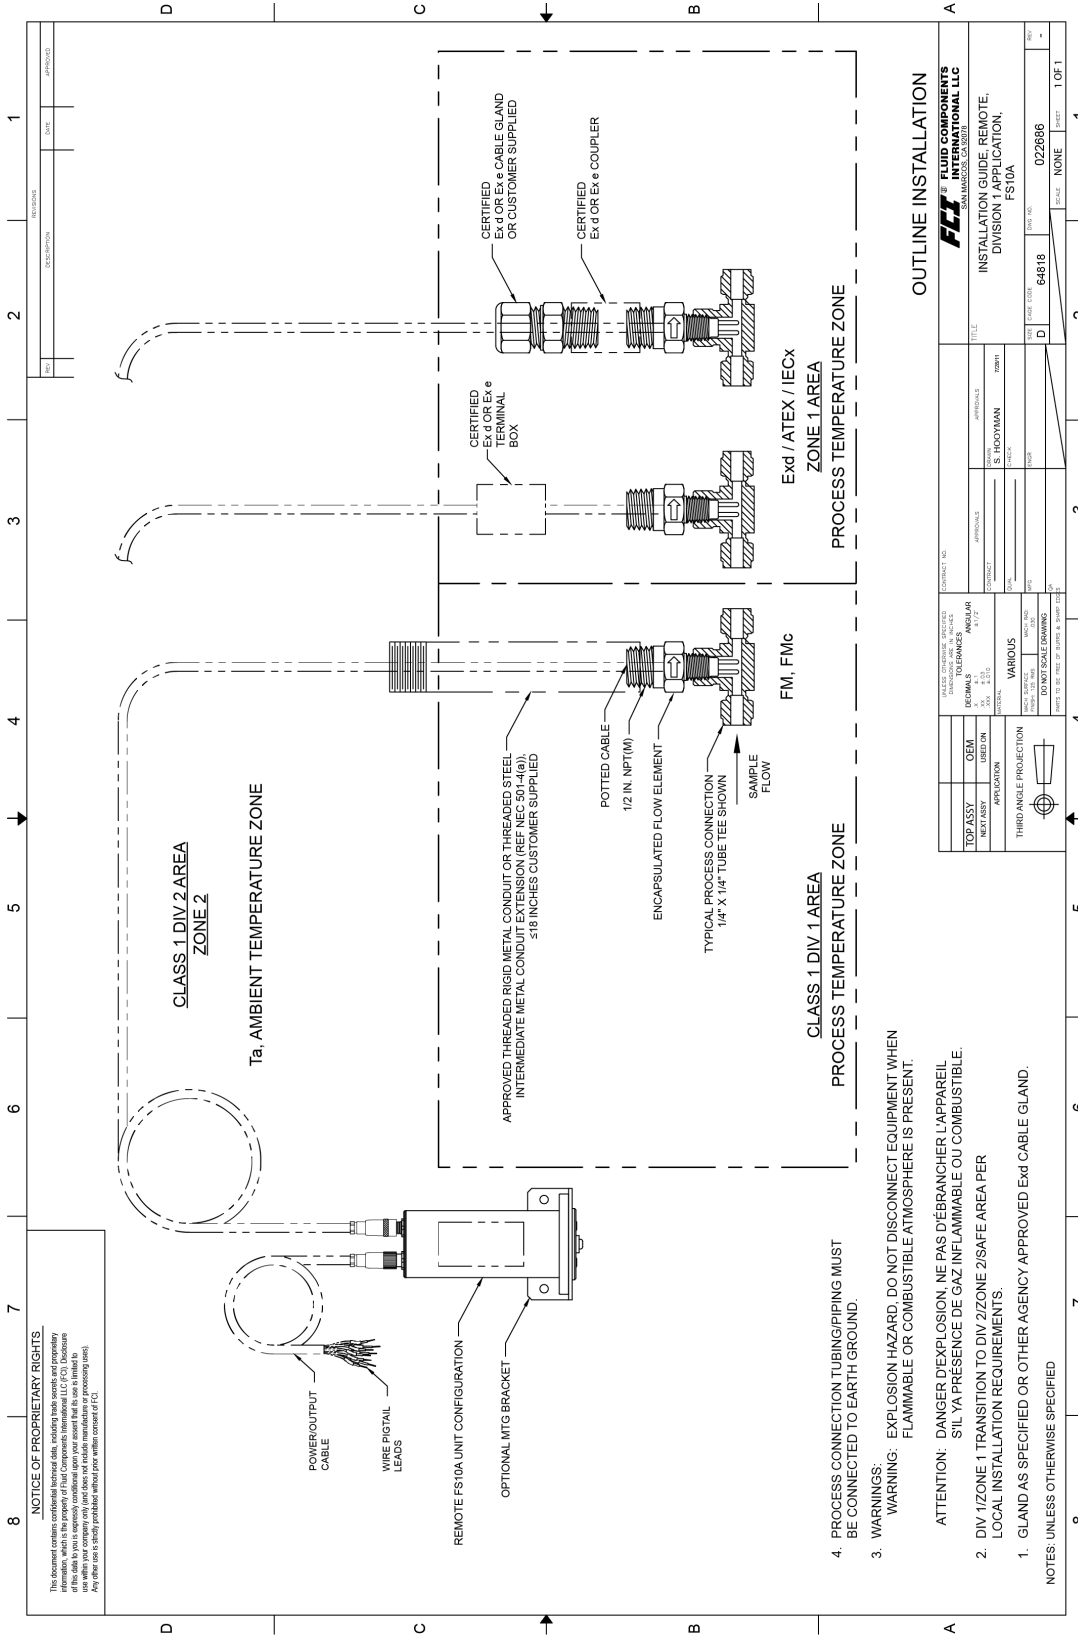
Drawing 022686 Outline Installation, Remote Div 1 Application (FS10A Shown)
